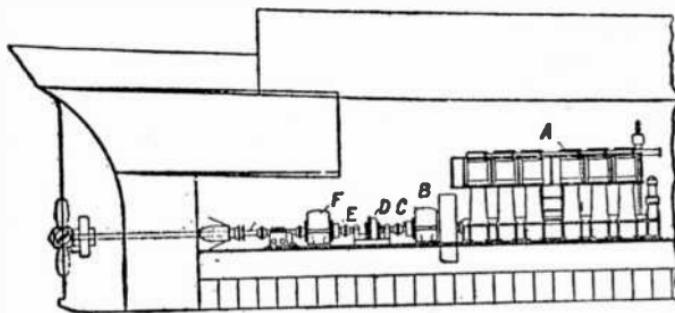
The *Menlees system* of propelling ships by gas engines. In the figure, A, is a six cylinder gas engine coupled to a dynamo B. The shaft C, of the dynamo and engine is adapted to be connected by a clutch D, with the shaft E, of the electric motor F, which is connected with the propeller shaft. *In operation* at all ahead ship speeds direct driving may be employed, but, for speeds less than half, the electrical transmission may be used, the motor F, receiving electrical energy from the dynamo B. The drive may also be employed for reversing the astern speed by not greater than half the full ahead speed, suitable switches and gear being provided.
